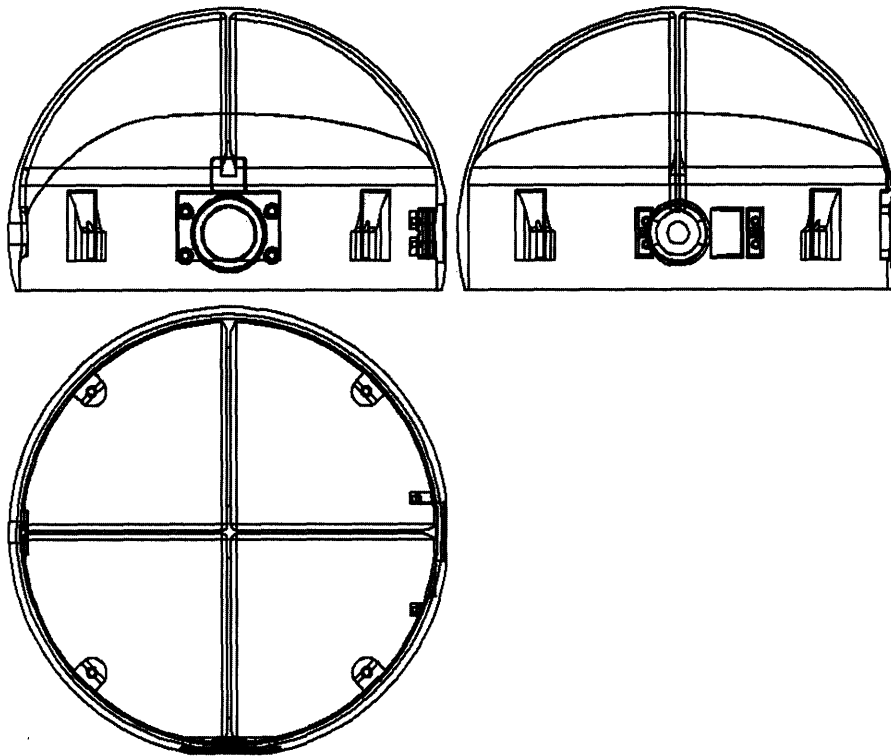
Assembly of Aluminum Pieces Plus Acrylic Plates
